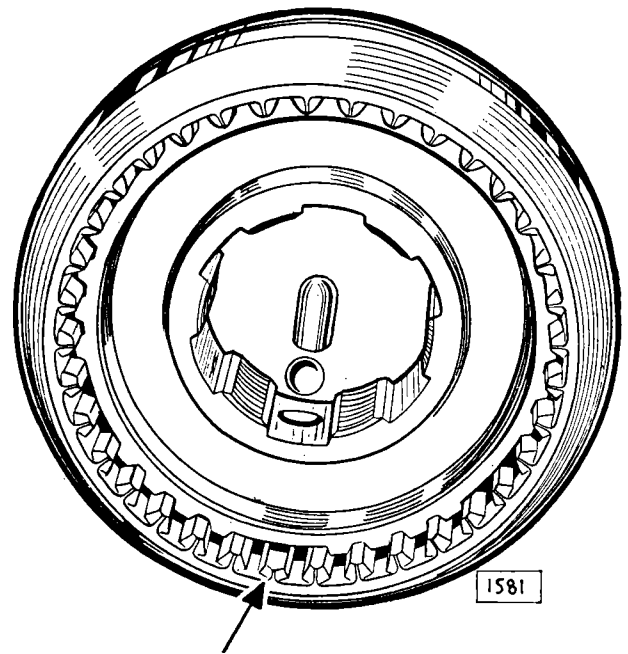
The relieved tooth in the operating sleeve must be in line with the interlock holes in the synchro sleeve
